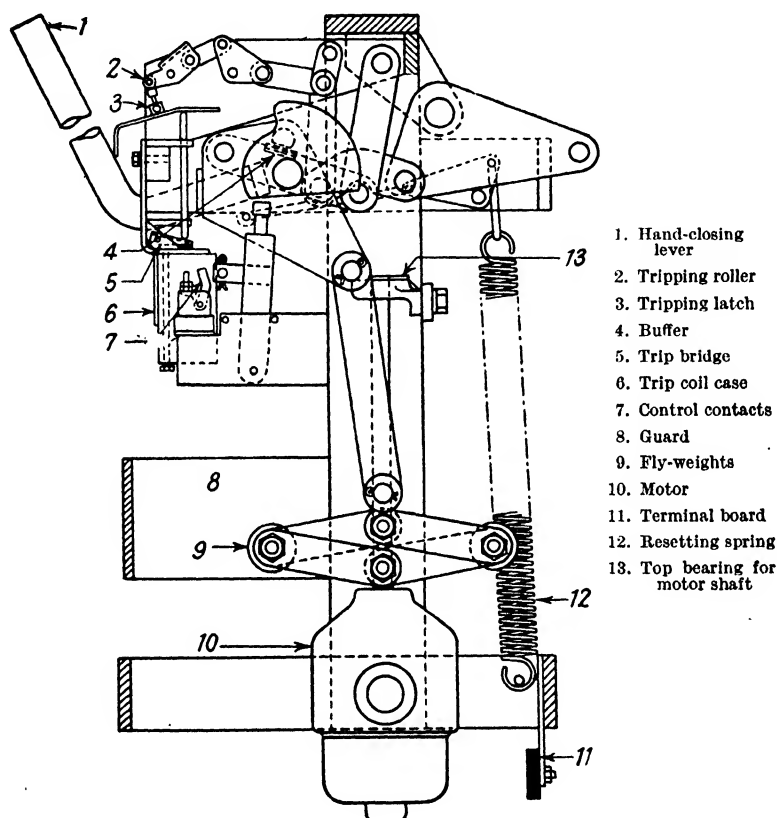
MOTOR OPERATED CLOSING MECHANISM
